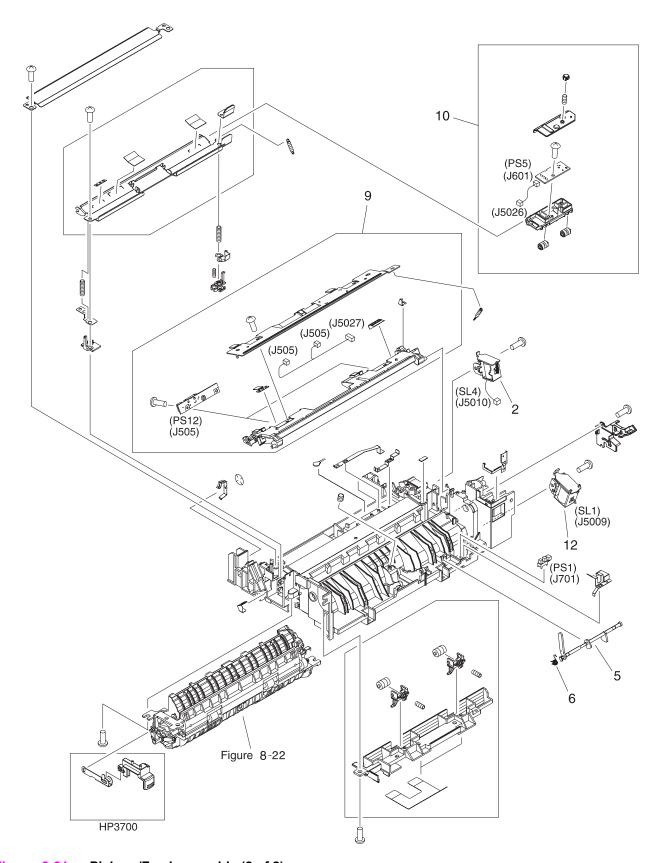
Pick-up/Feed assembly (2 of 2)
